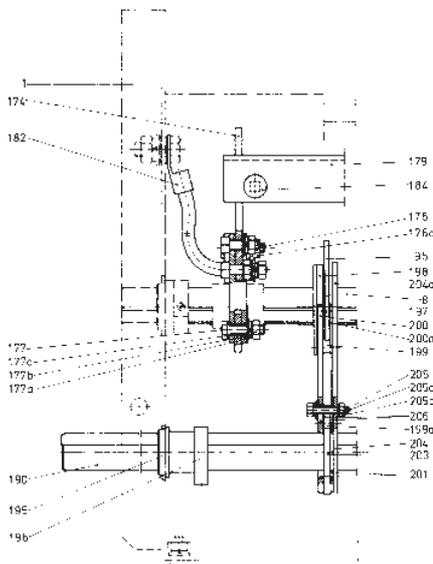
Interlock mechanism and contact blade holder, with earthing cable connection
